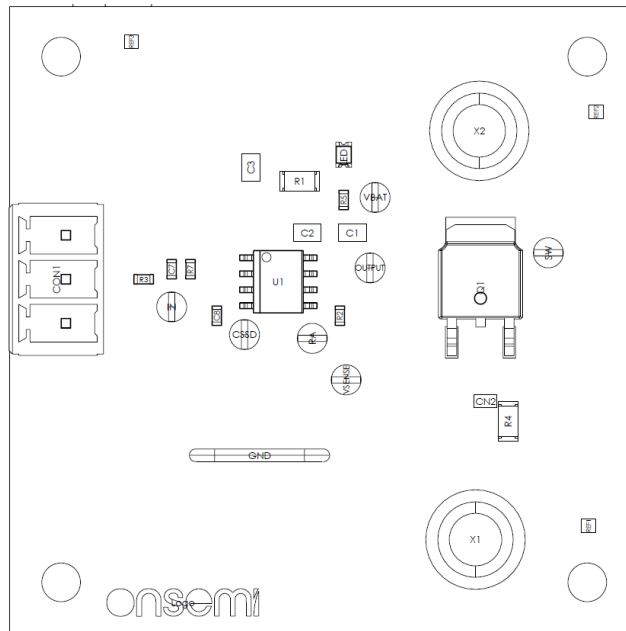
FAD1100EVB PCB Top Assembly Drawing
